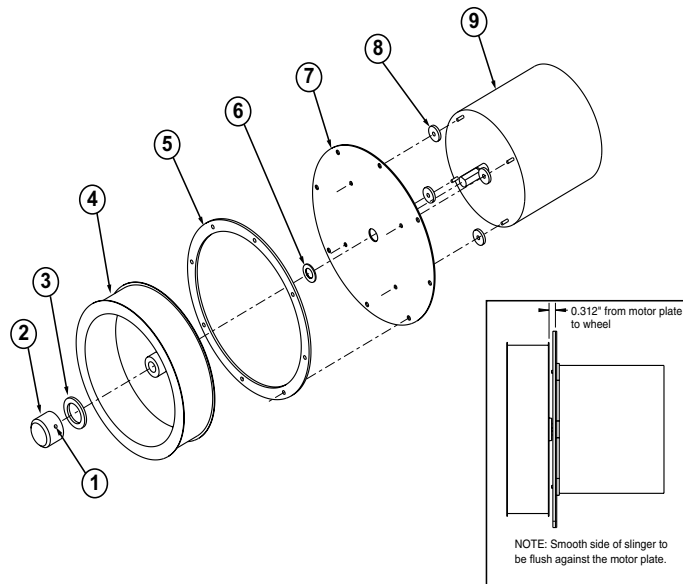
Venter Motor and Wheel Assembly (Refer to Table 34)
